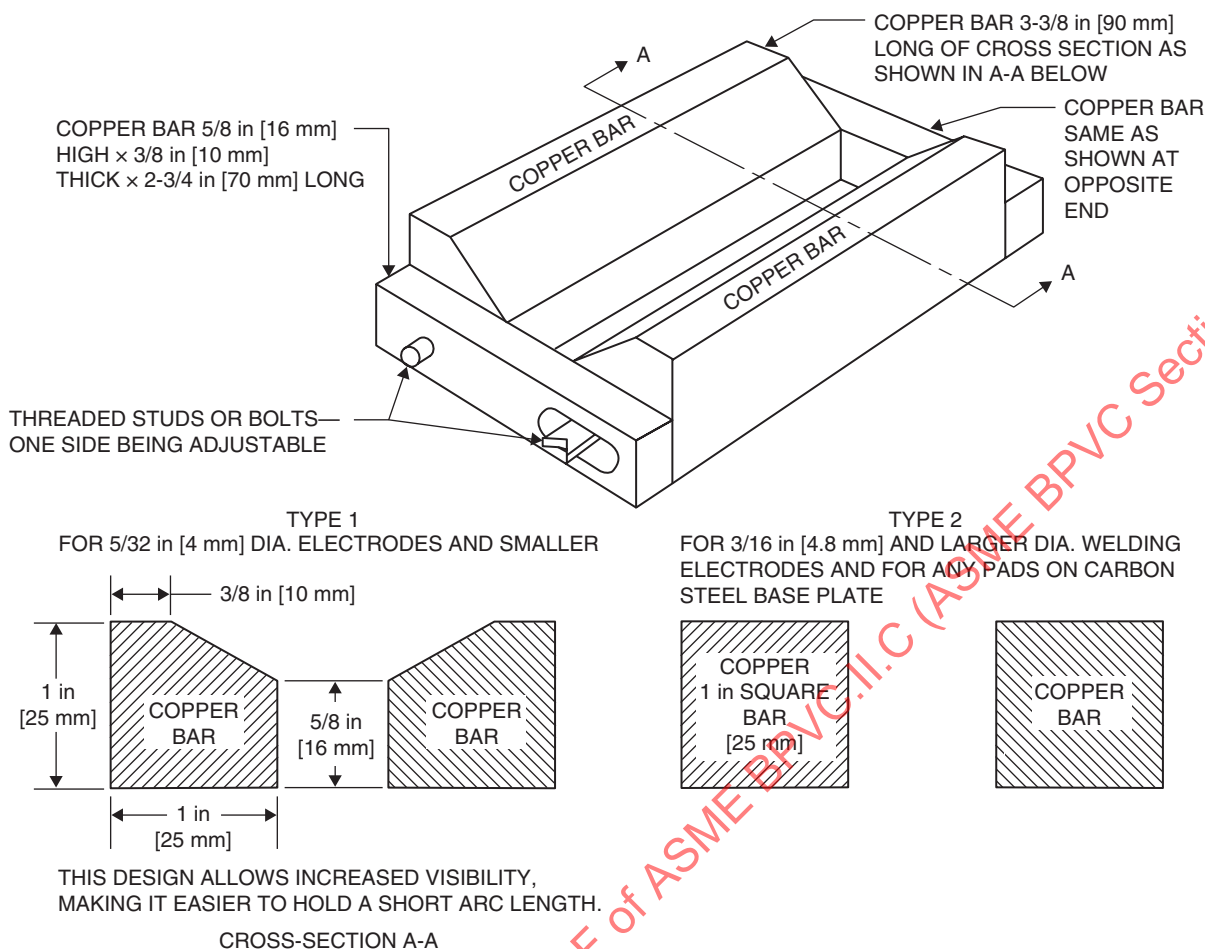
Optional Welding Fixture for Welding Ferrite Test Pads
